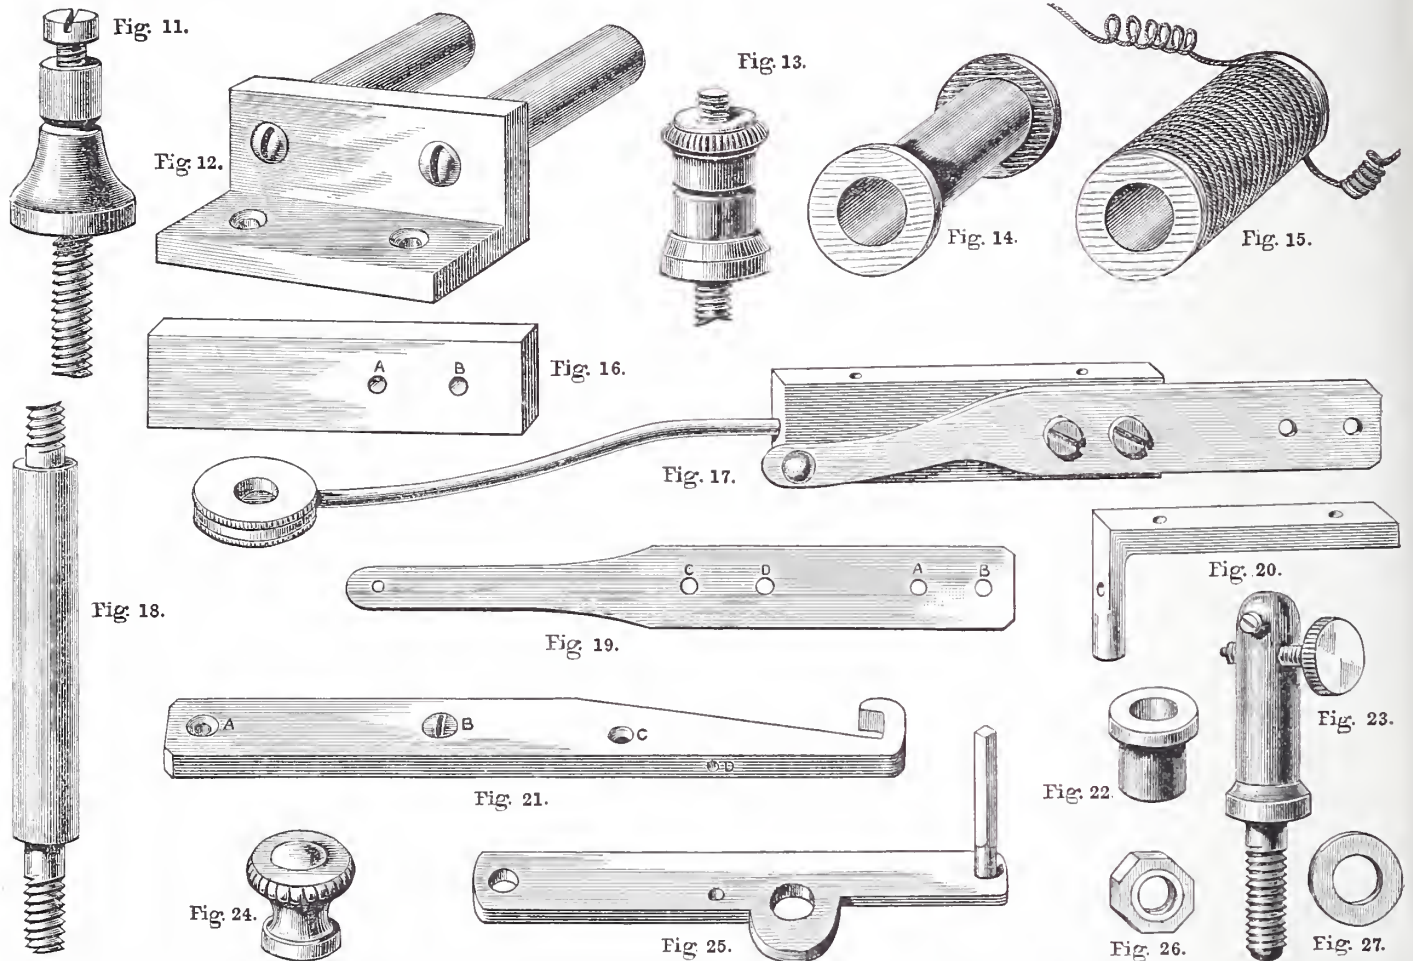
Pivot Pillar for Trigger. Fig. 12.—Magnet attached to Yoke. Fig. 13.—Binding Screw: Telegraph Form. Fig. 14.—Wood Bobbin for Electro-Magnet Core. Fig. 15.—Bobbin Wound with Silk-Covered Wire. Fig. 16.—Iron Armature. Fig. 17.—Armature, Spring Hammer, and Shaft Connected. Fig. 18.—Bell Pillar. Fig. 19.—Armature Spring. Fig. 20.—Brass Catch for Trigger of Relay. Fig. 21.—Trigger for Relay. Fig. 22.—Insulating Collar for Pillar. Fig. 23.—Contact or Break Pillar. Fig. 24.—Nut for Top of Bell Pillar. Fig. 25.—Another Form of Relay Trigger. Fig. 26.—Brass Nut. Fig. 27.—Brass Collar.
